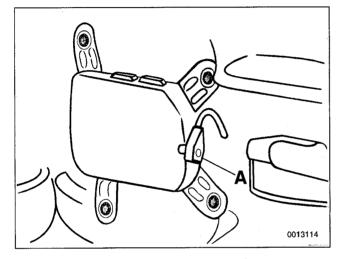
Front side-impact airbag (inner door panel removed). A is electrical harness connector.
